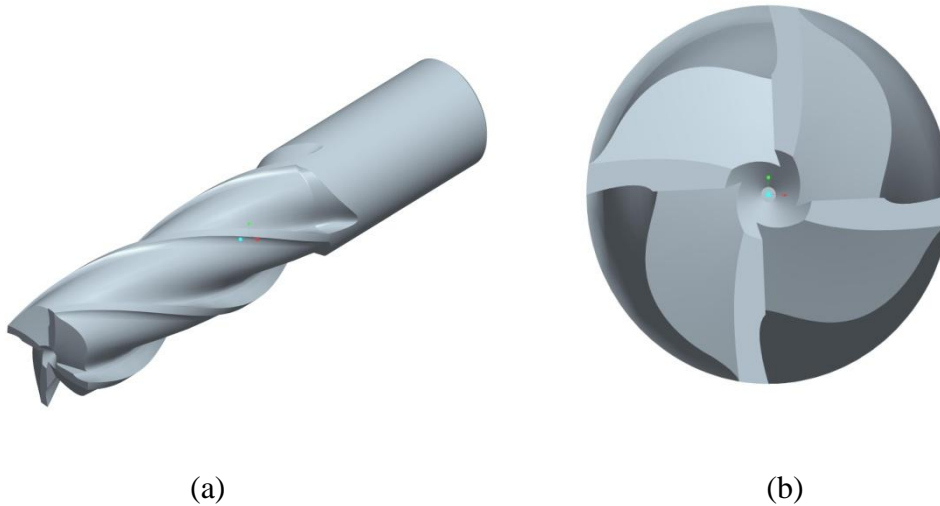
(a) Isometric view of end mill (b) top view of end mill
